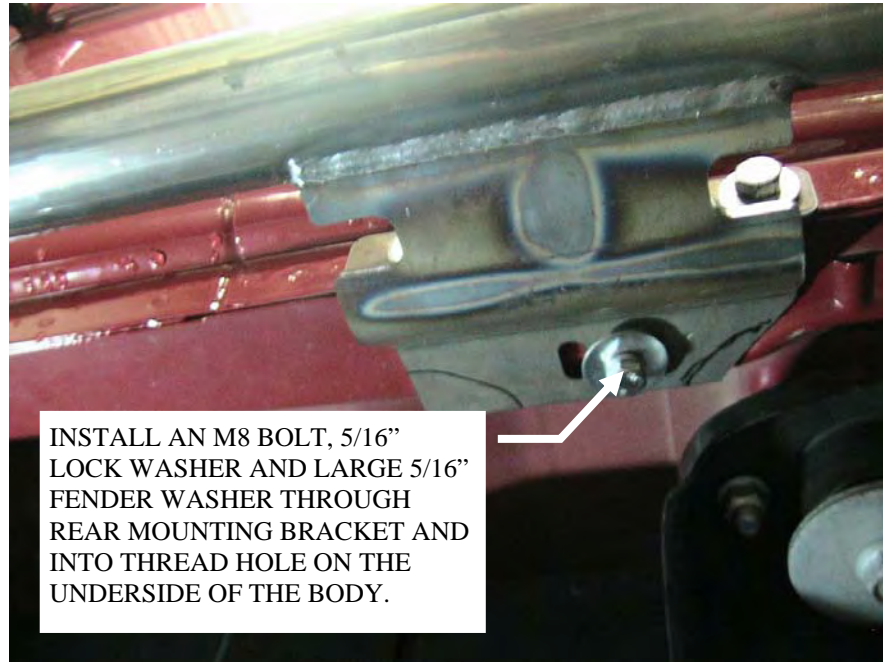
Rear Metric bolt installation in rear mounting location, driver's side.
